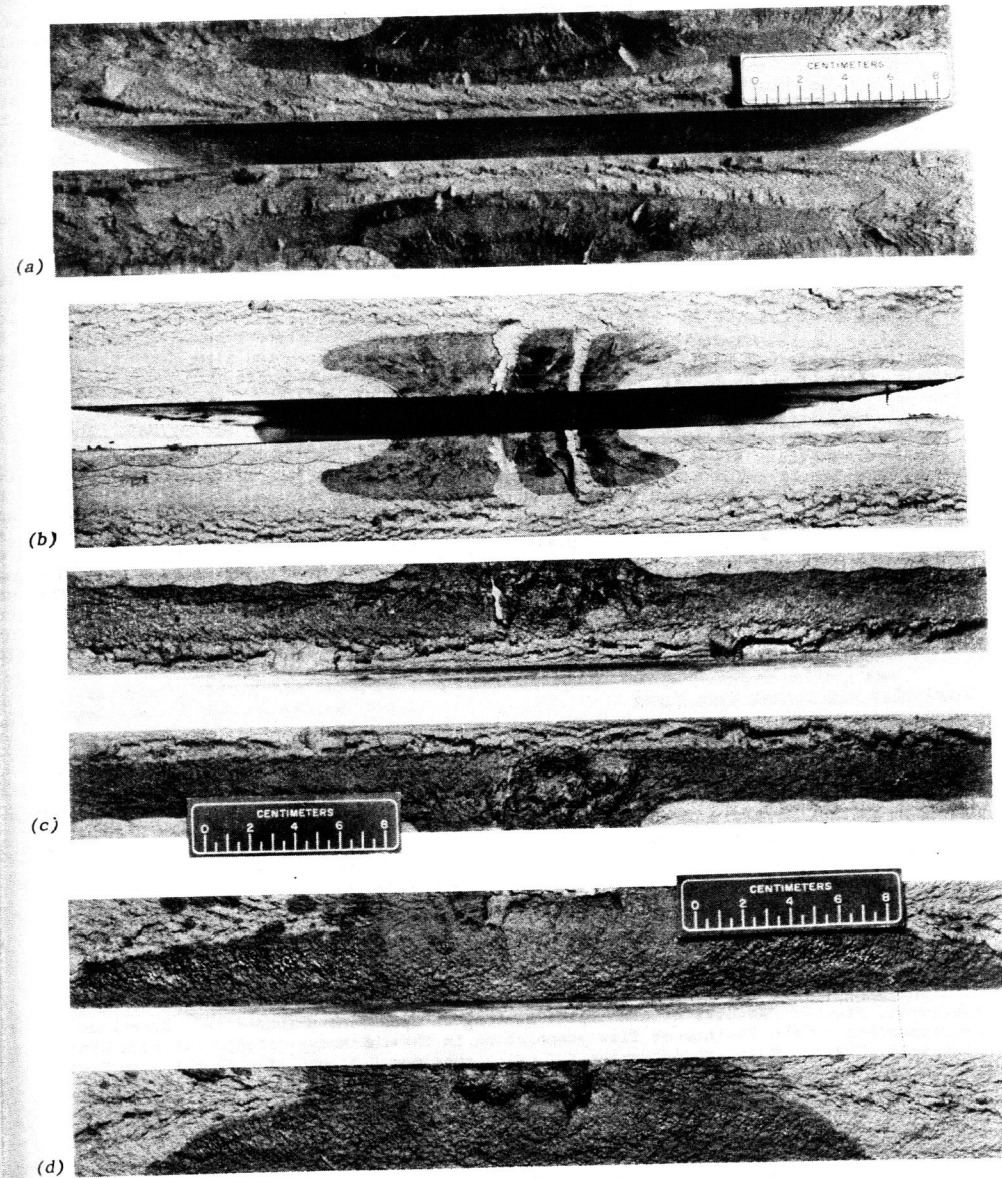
Fracture surfaces from top to bottom of clad plates (a) CP-15, (b) CP-17, (c) CP-19 and (d) unclad plate CP-21.
